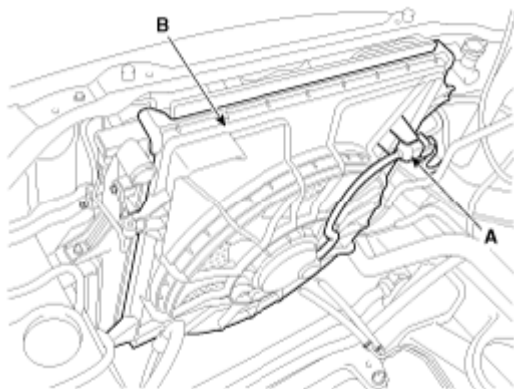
Identifying Fan Connector & Cooling Fan Assembly
